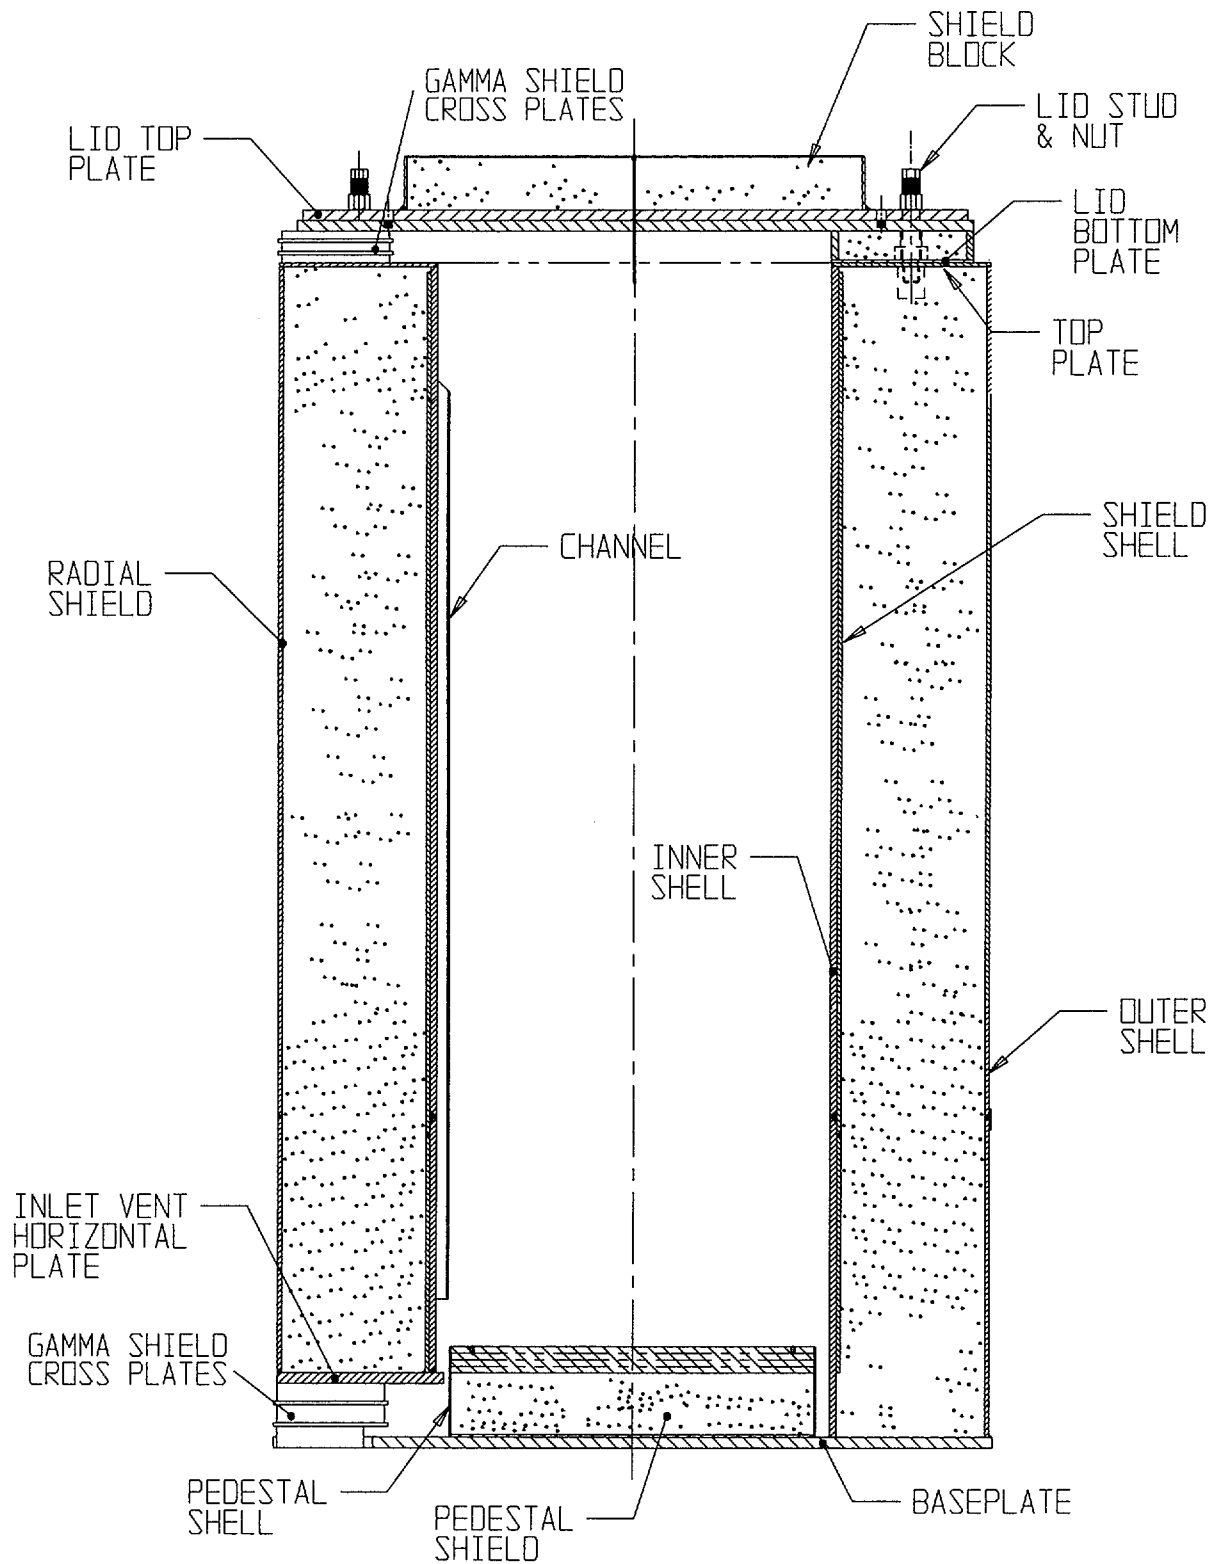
A; HI-STORM 100S OVERPACK CROSS SECTIONAL ELEVATION VIEW
